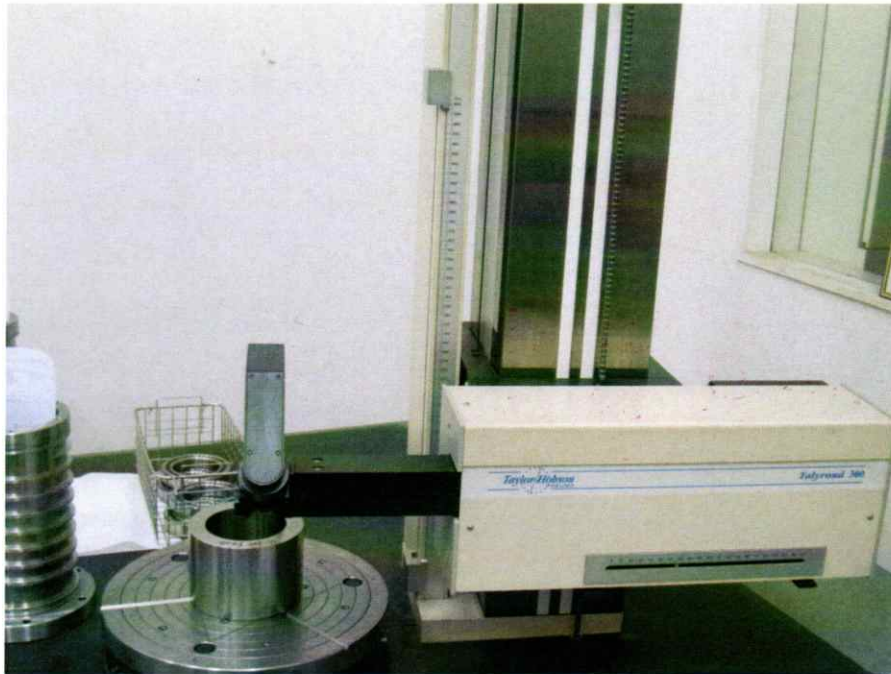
Actual measurement of machining roundness of the workpiece
